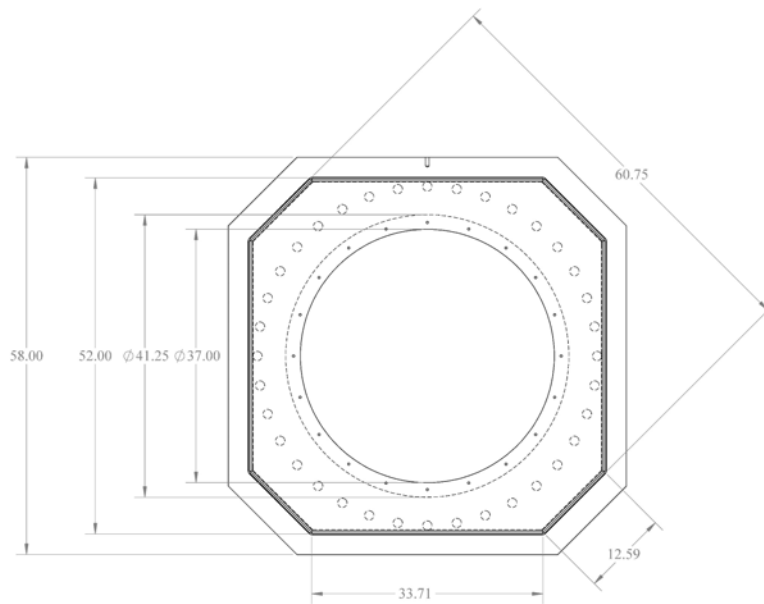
Dimensions of the test section with flat-to-flat lengths and hole diameters.
